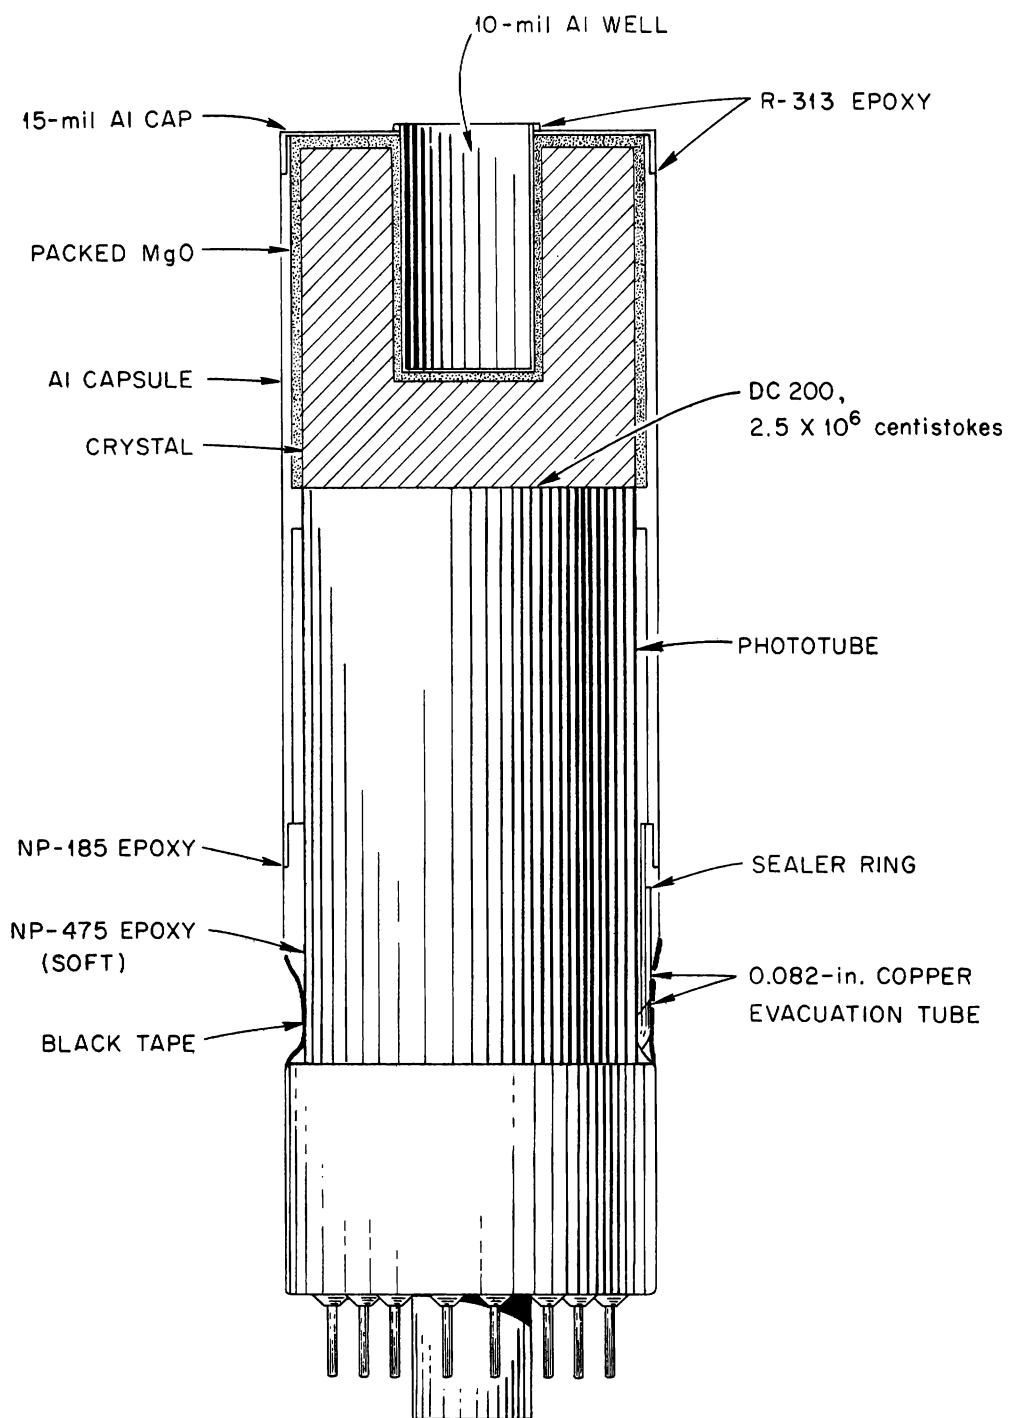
2 x 2 in. Well Crystal Mounted on a 2-in. Phototube.
